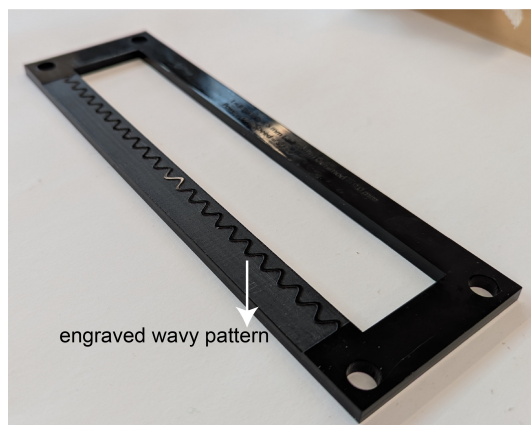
Laser cut mold with engraved waving pattern on its edge.
